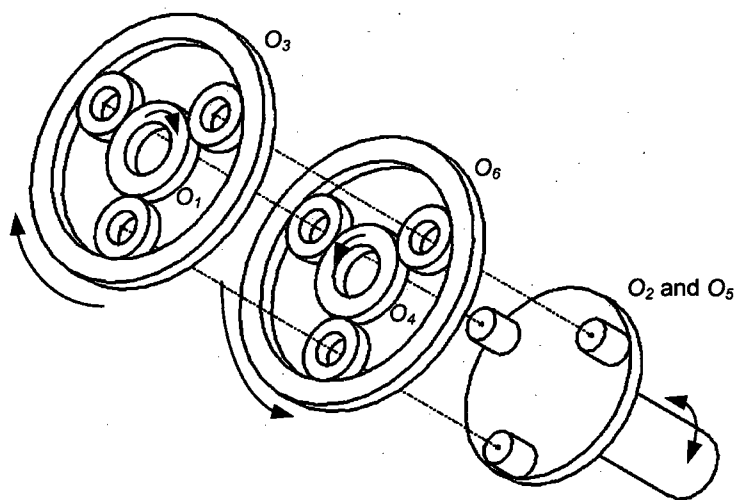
Exploded view (simplified) of the dual differential mechanism
